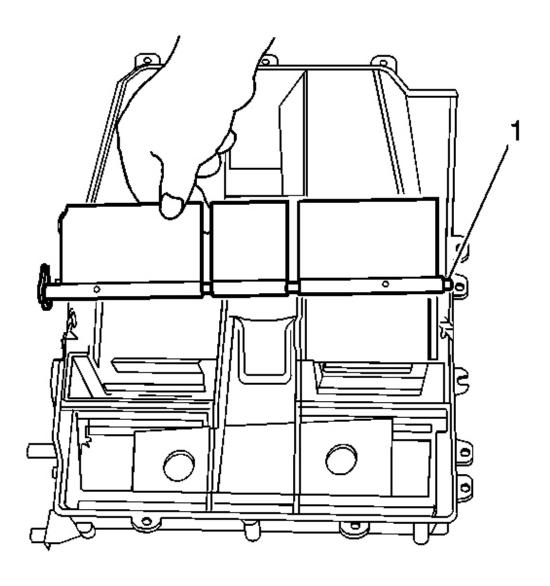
Identifying Air Temperature Door Courtesy of GENERAL MOTORS CORP.
